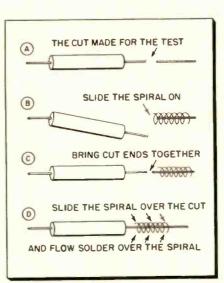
After a lead is cut and component tested, slide a tight fitting tinned wire spiral over both ends, centering spiral over cut. Crimp spiral ends and solder.
